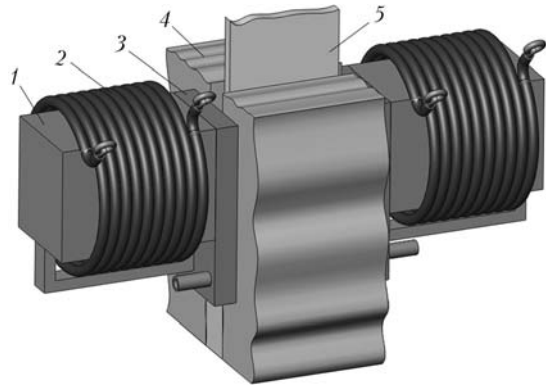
Scheme of application of transverse magnetic field with the help of coils mounted to welded parts: 1 – specimen being welded; 2 – electromagnetic system; 3 – tabs; 4 – electrode; 5 – water-cooled forming strap
